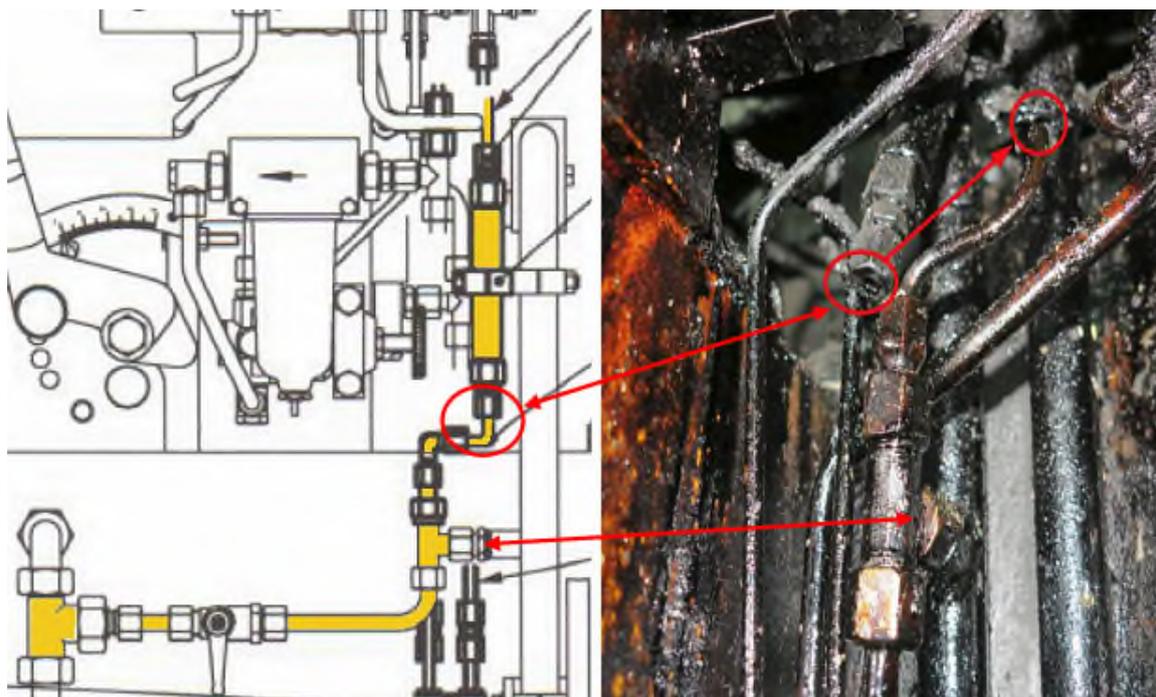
Fractured fuel oil pressure gauge supply line schematic and photograph post fire
